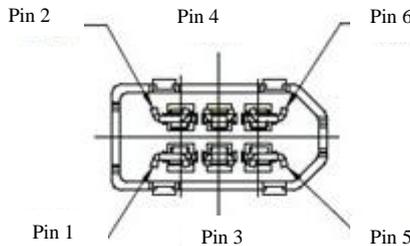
Front Elevation of CN3 Plug Soldering Port CN3 of Driver
